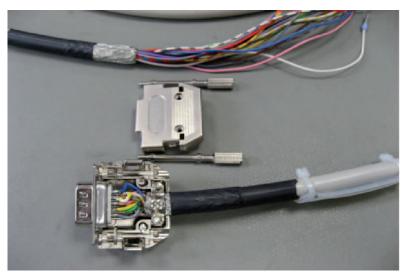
Breakout cable with 15-pole HD-SUB connector and open cable end
